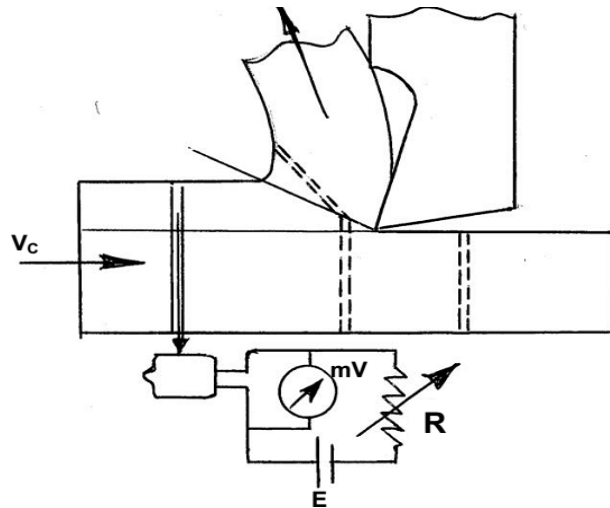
measuring temperature at shear plane and tool flank by photocell technique
